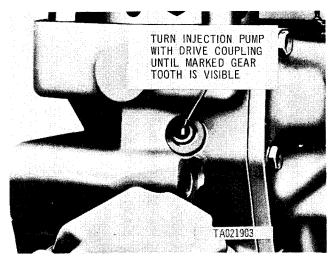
Fuel injection pump hole showing marked grear tooth.
